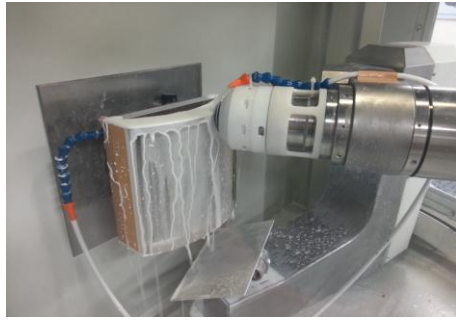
Fused silica mandrel being deterministically polished inside 7-axis CNC machine.
